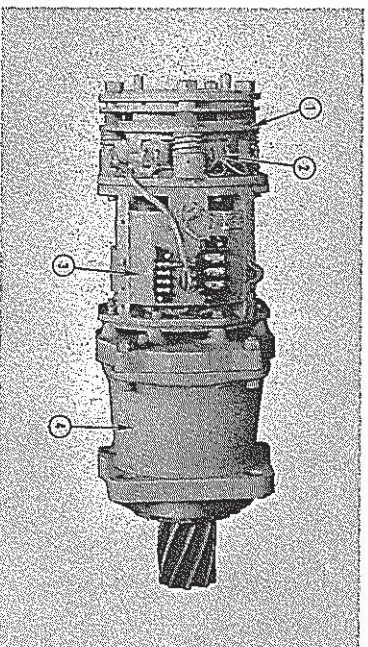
A.C. MOTOR AND GEAR BOX
